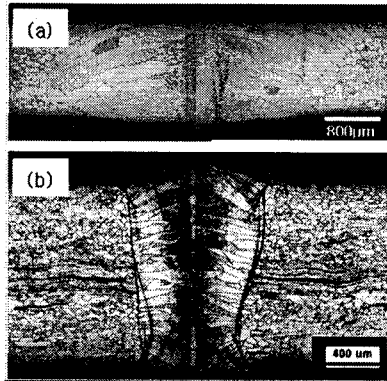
Macrostructures of GTA weld (a) and laser weld (b).
